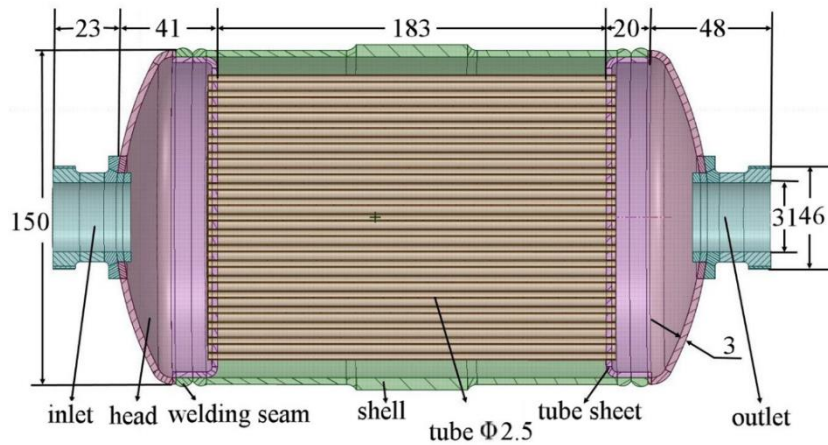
The geometry of an assembled shell-and-tube heat exchanger (dimensions in millimetres)
